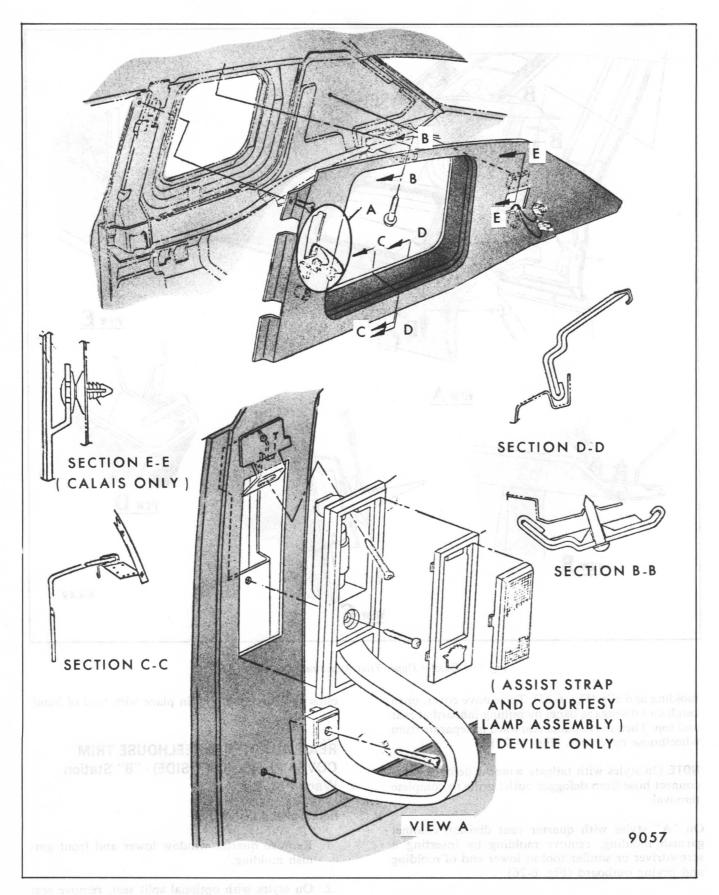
Quarter Upper Trim Attachment - Cadillac "47" Styles
